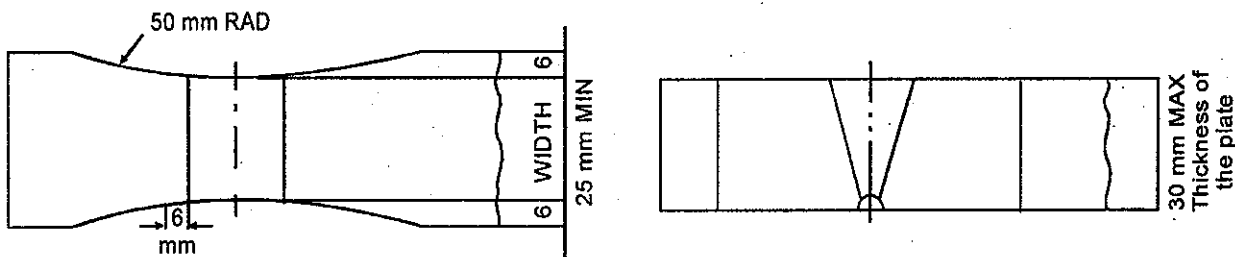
A — REDUCED SECTION TENSILE SPECIMEN
